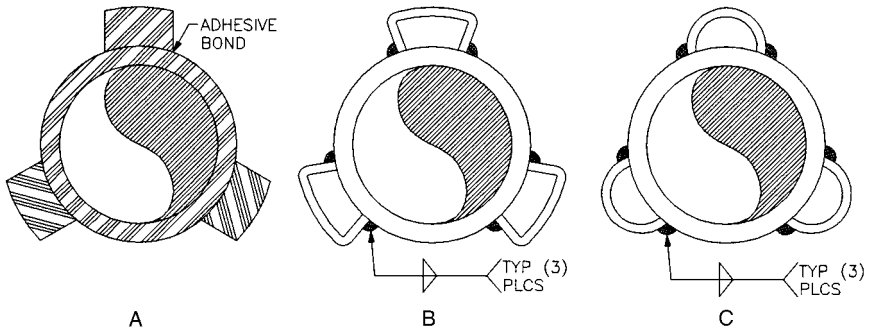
Examples of support pad-type internal supports: (a) illustration of a typical bonded three-pad support arrangement for a fiberglass primary pipe; (b) illustration of a metallic primary pipe having three pipe saddles welded to its surface; (c) use of welded half-pipe saddles on a primary pipe.
